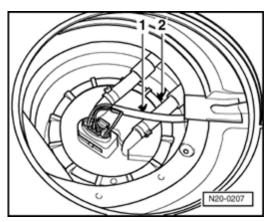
Installation Position Of Fuel Delivery Unit Flange Courtesy of VOLKSWAGEN UNITED STATES, INC.
